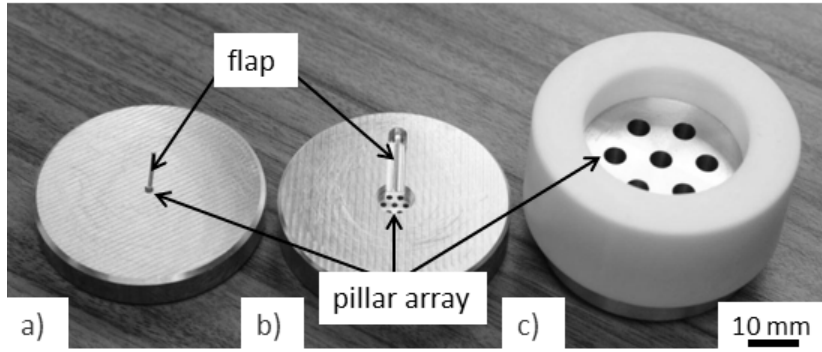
Milled aluminum casting molds with the hexagonal pillar array a) size 3; b) size 2; c) size 1. Size 3 and size 2 has in addition a flap to enable a better demolding of the molded material.
